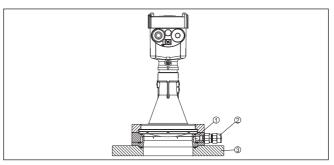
Rinsing connection with radar sensor with adapter flange in other sizes
